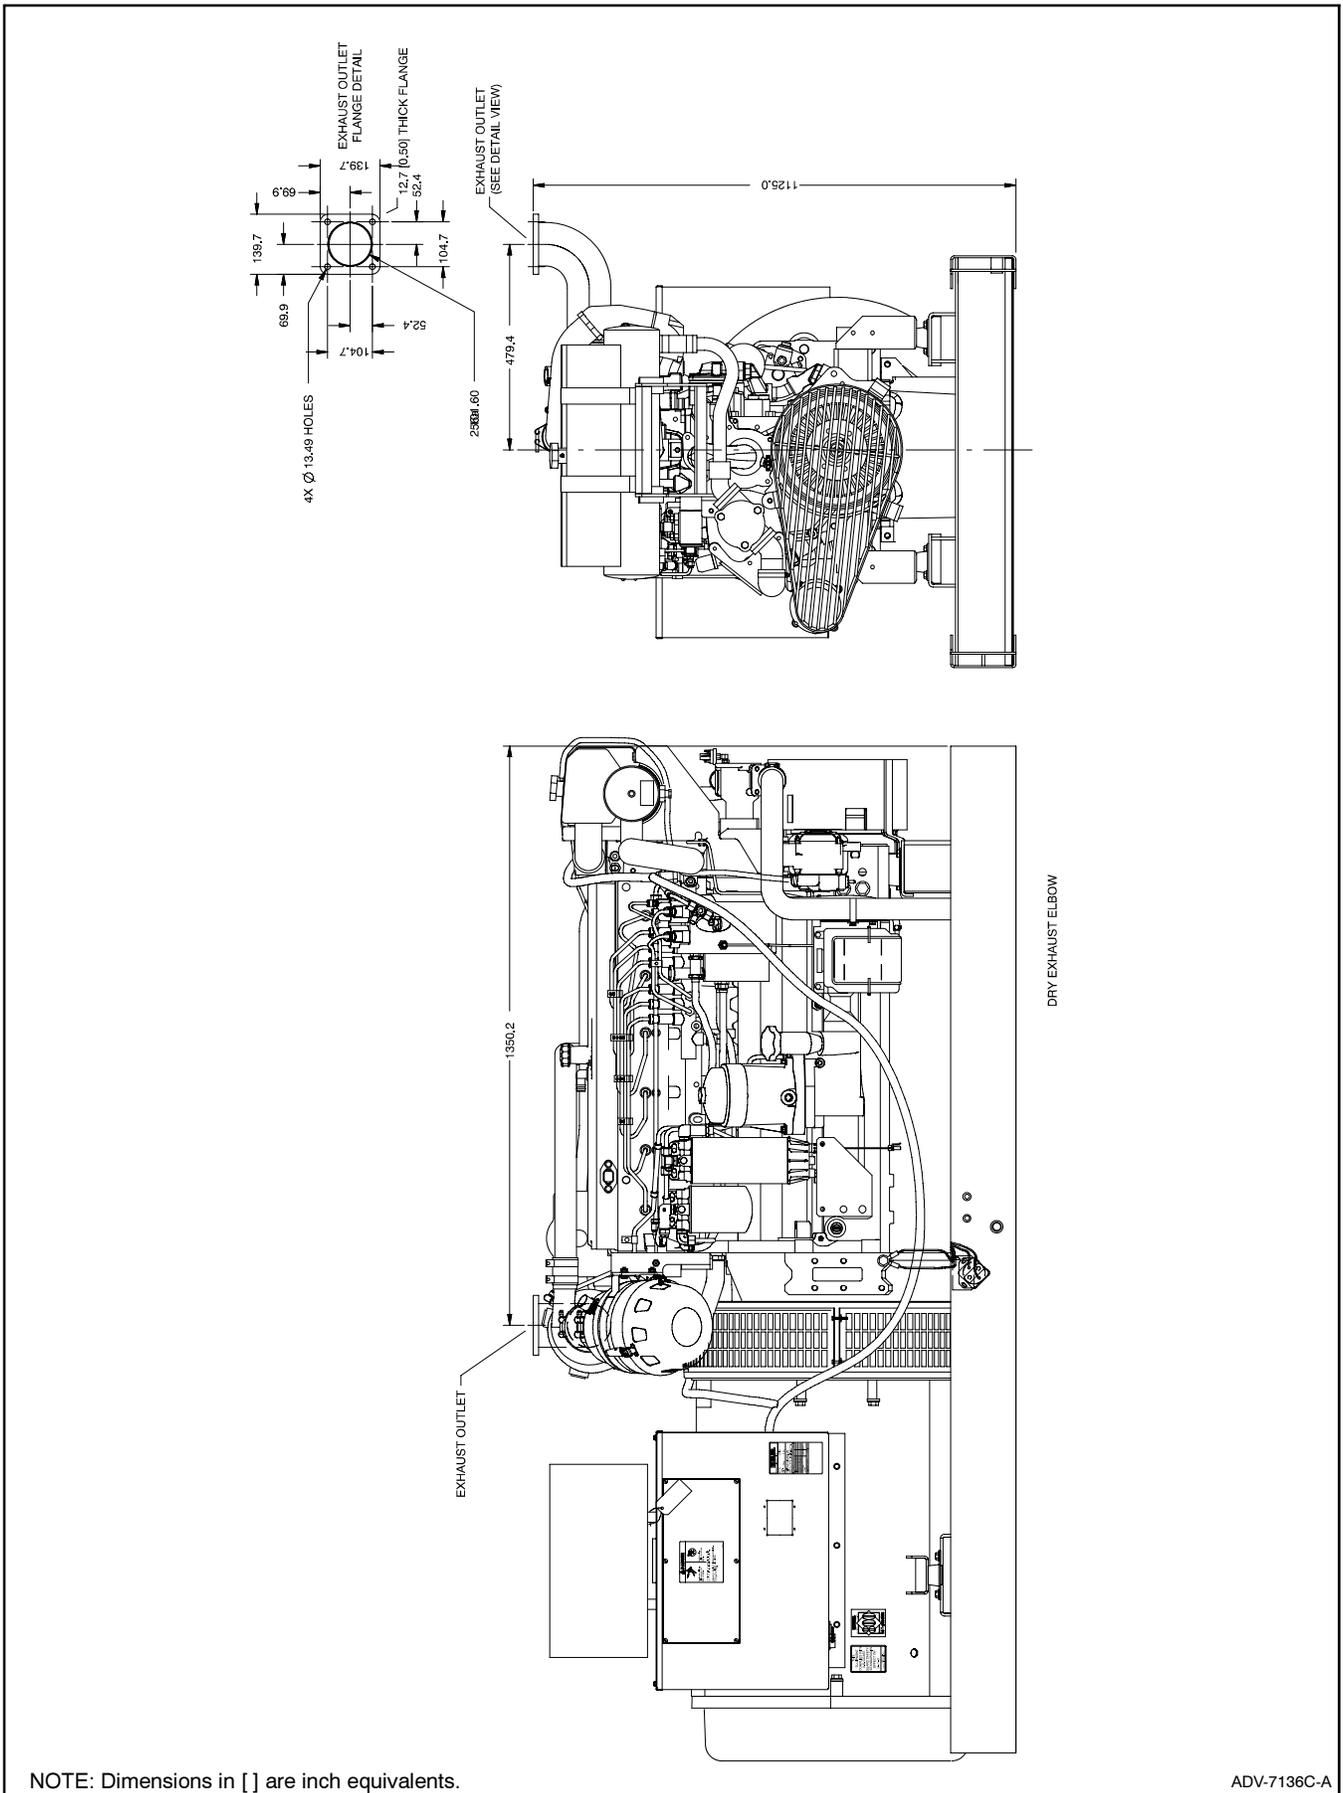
Dimension Drawing, 180EOZD and 150EFOZD with Dry Exhaust Elbow
